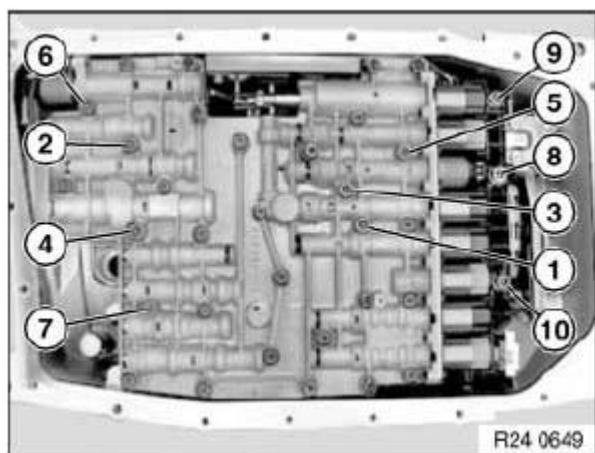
Identifying Tightening Sequence Of Mechatronics Screws
